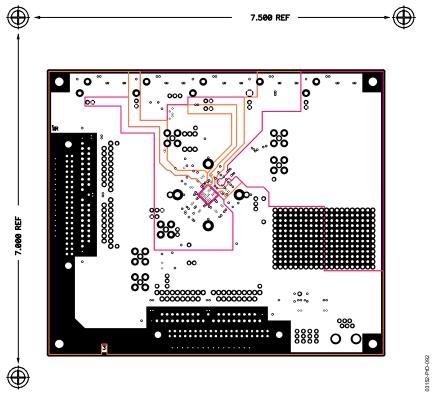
PCB Assembly, Layer 3 Metal (Power Plane)
